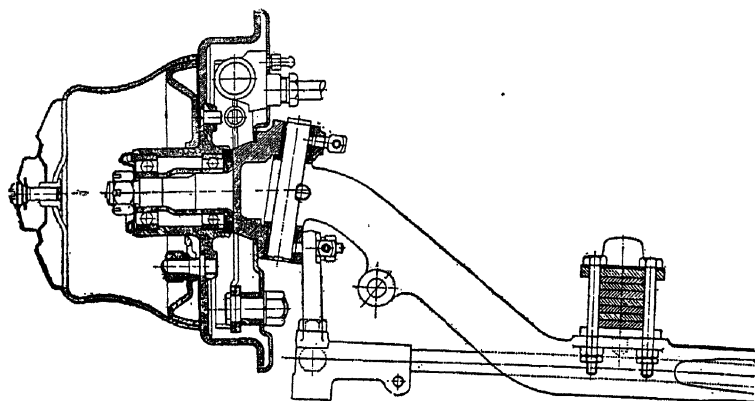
Front Axle with Ball Bearings for the Wheel and Hub.
